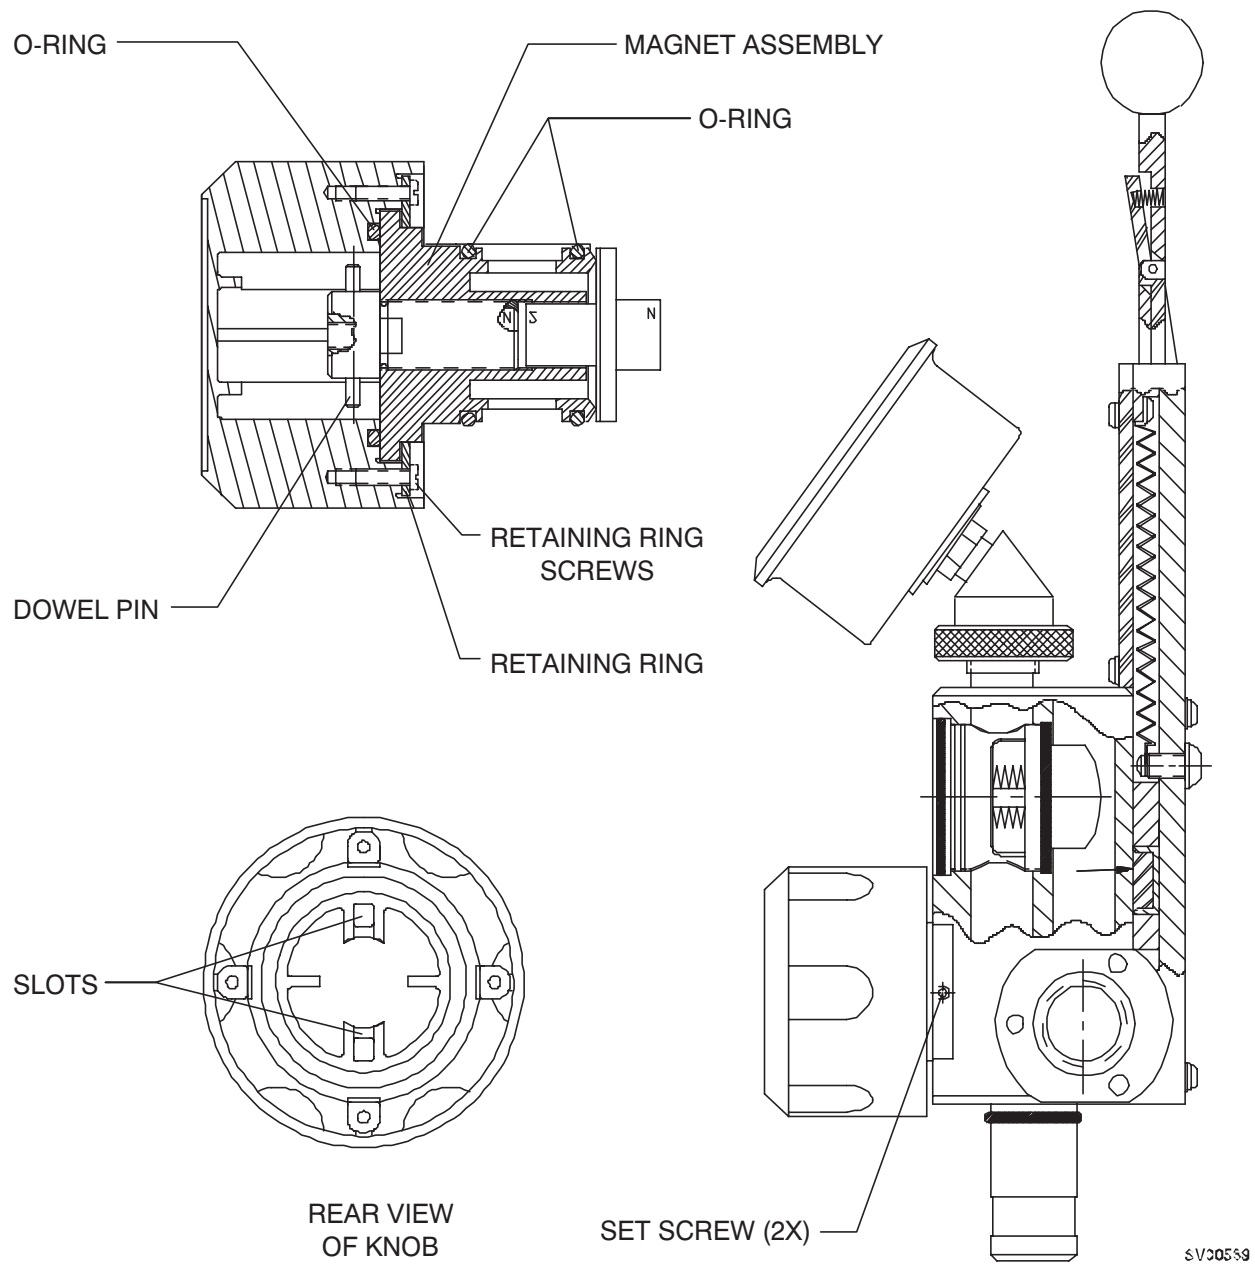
PEEP Valve Magnet Assembly Replacement
